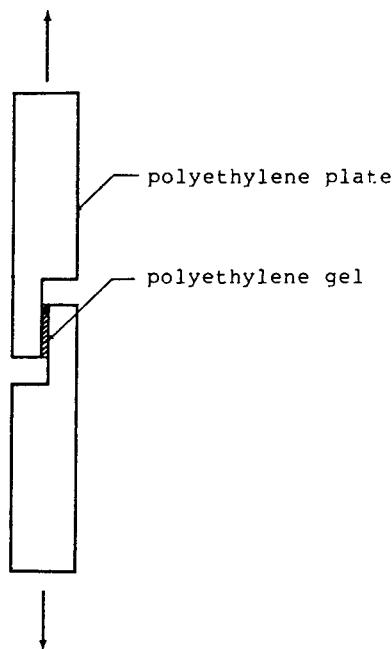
The scheme of polyethylene plate for tensile shearing test (by ASTM D906-64).
